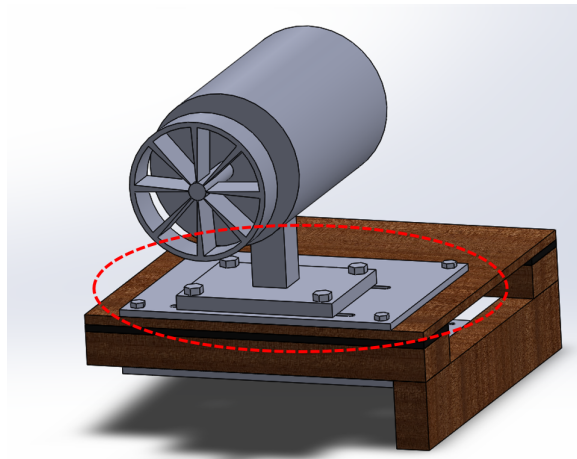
The tightening system for the motor and the piston compressor marked with the red circle.
